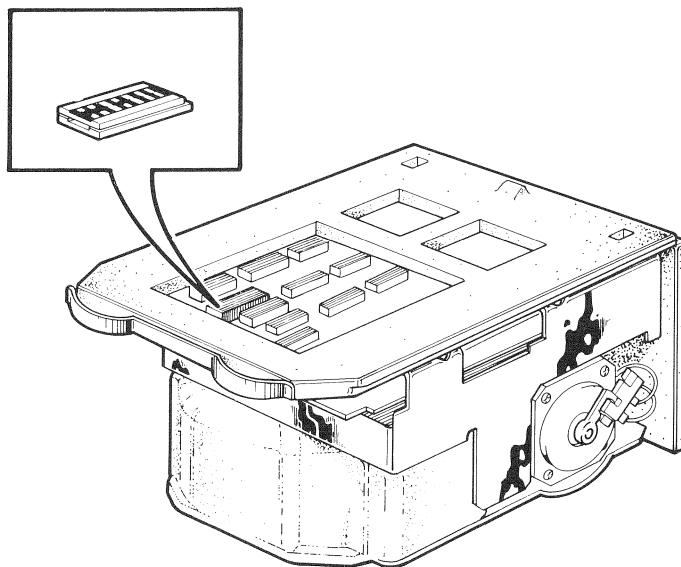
RD51 Disk Drive and Shunt Jumper
